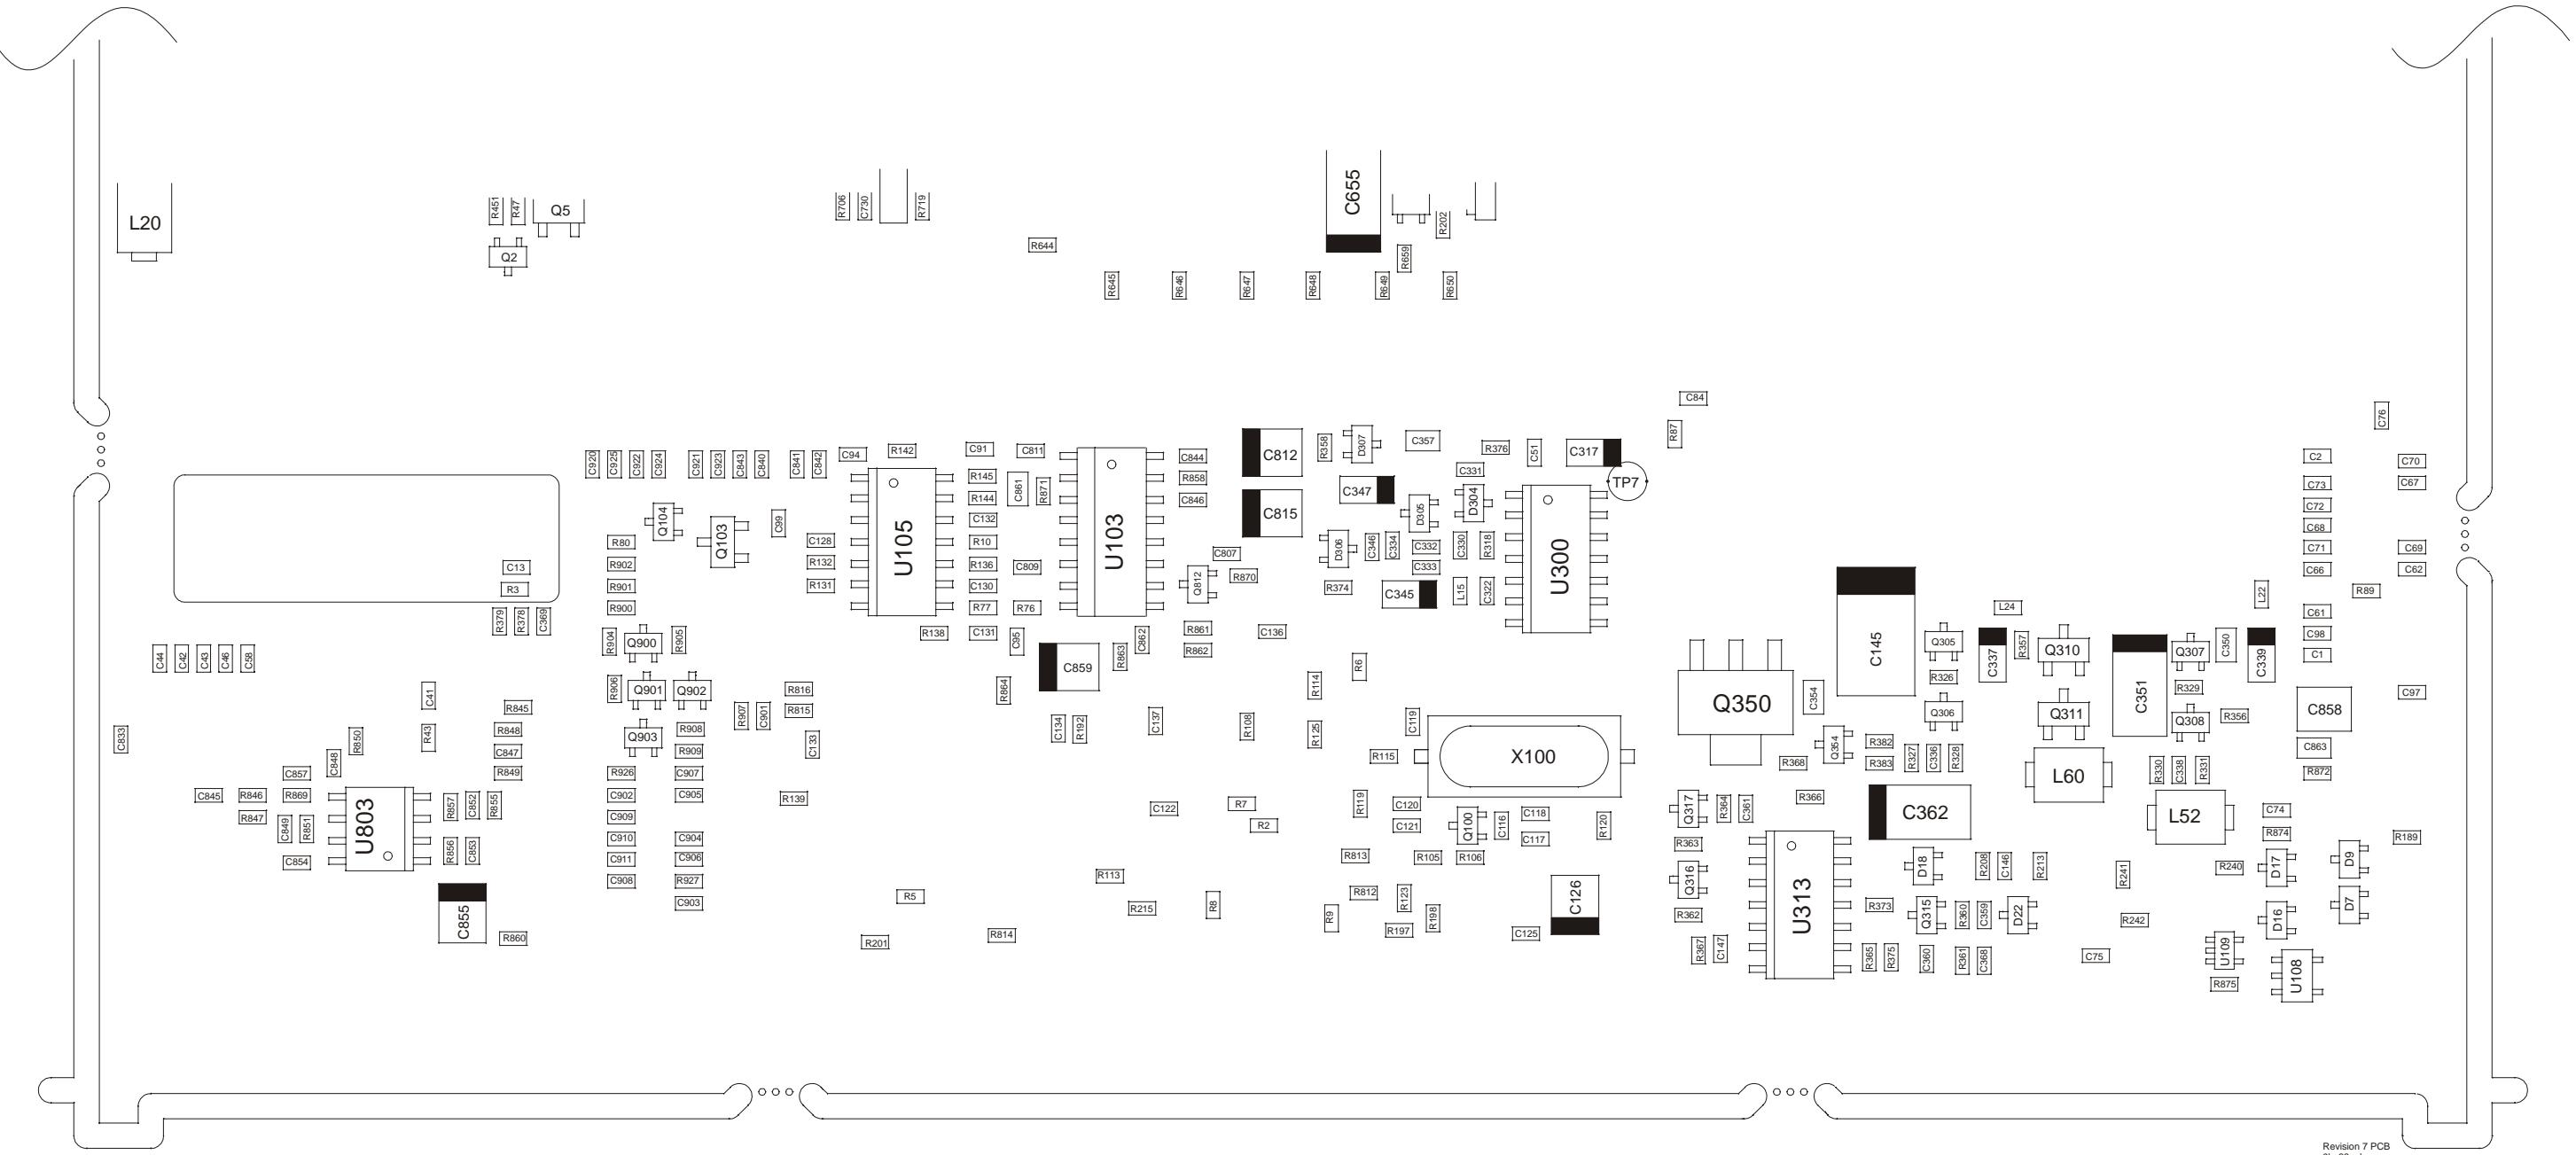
SRM9000 PCB Layout, Bottom (2/2)
